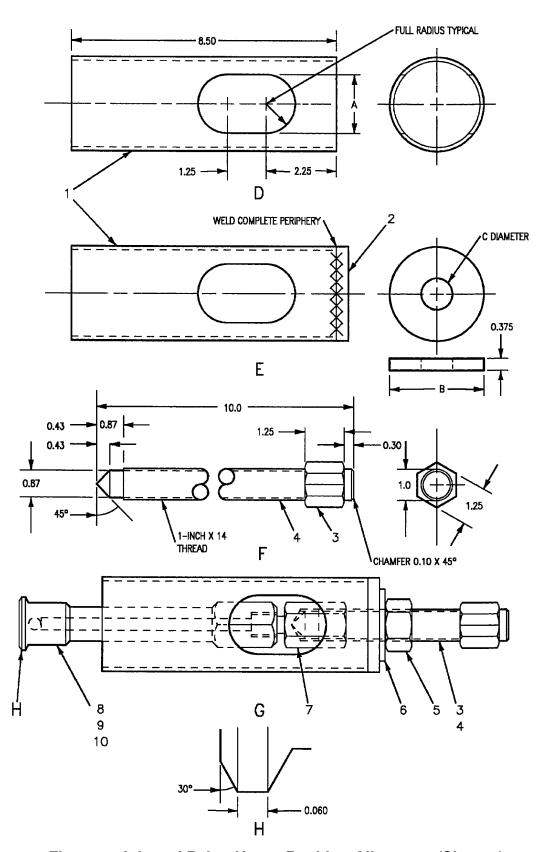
Inboard Pylon Upper Bushing Alignment (Sheet 3)
